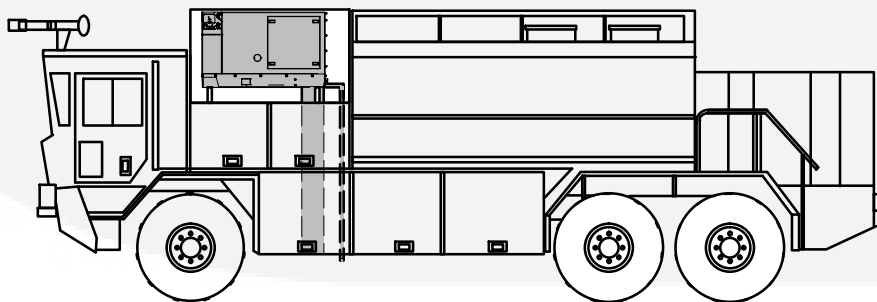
TYPICAL GENSET INSTALLATIONS
